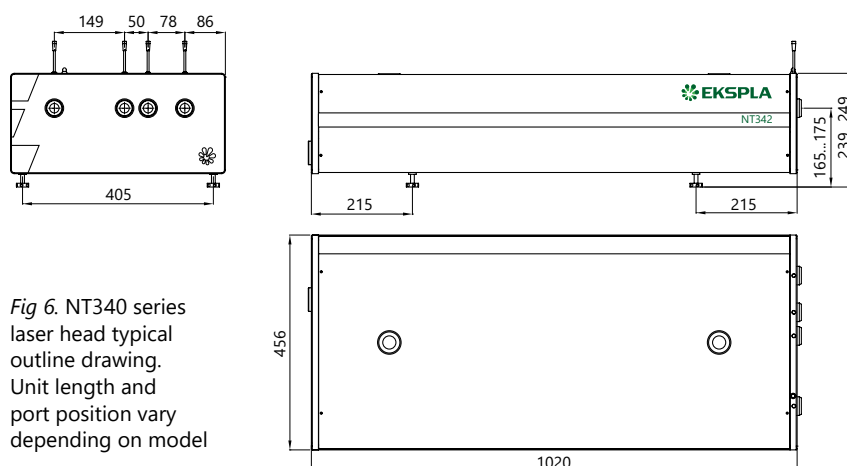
NT340 series laser head typical outline drawing. Unit length and port position vary depending on model
